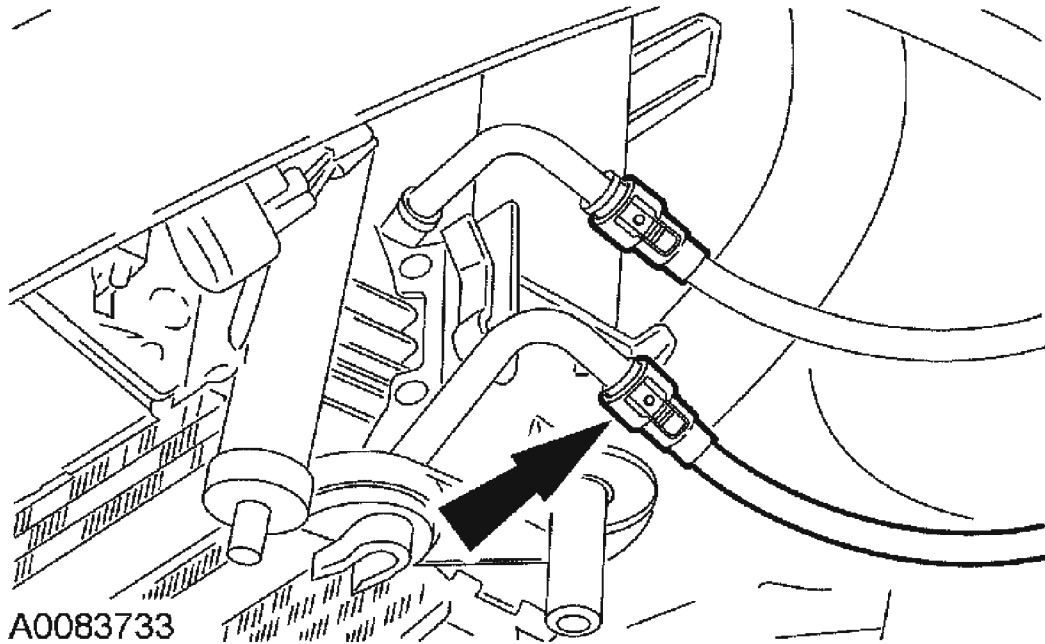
Connecting Return Hose To Transmission Fluid Cooler
